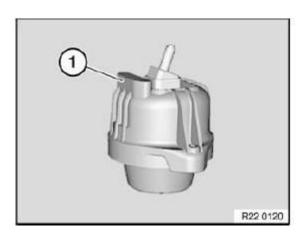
Identifying Engine Mount Rubber Section Courtesy of BMW OF NORTH AMERICA, INC.
